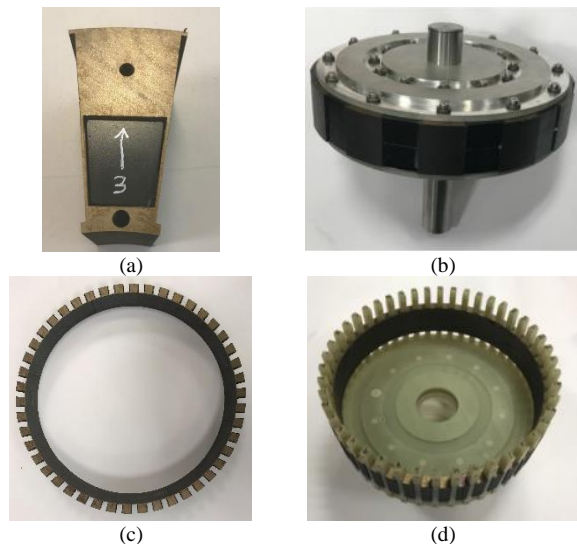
(a) One inner rotor magnet and lamination segment, (b) Fully assembled inner rotor, (c) Cage rotor laminations, (d) Fully assembled cage rotor with the Garolite G10 bar supports.
